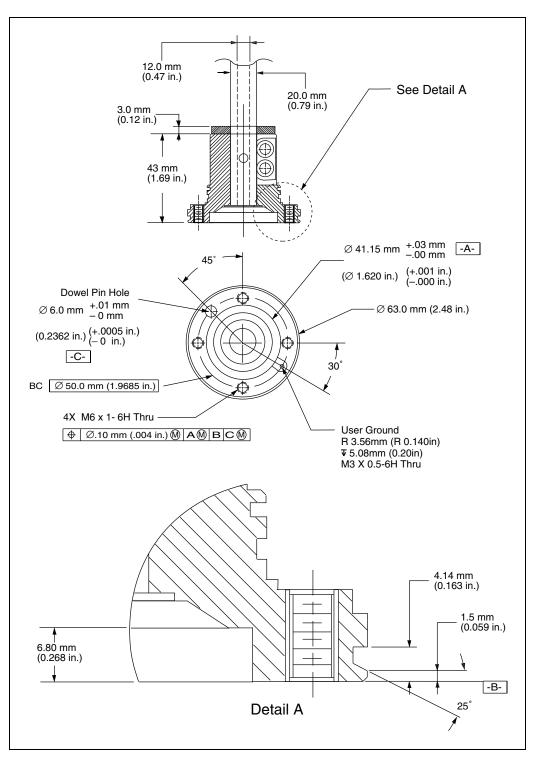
Tool Flange Dimensions for Cobra 350 Robots
